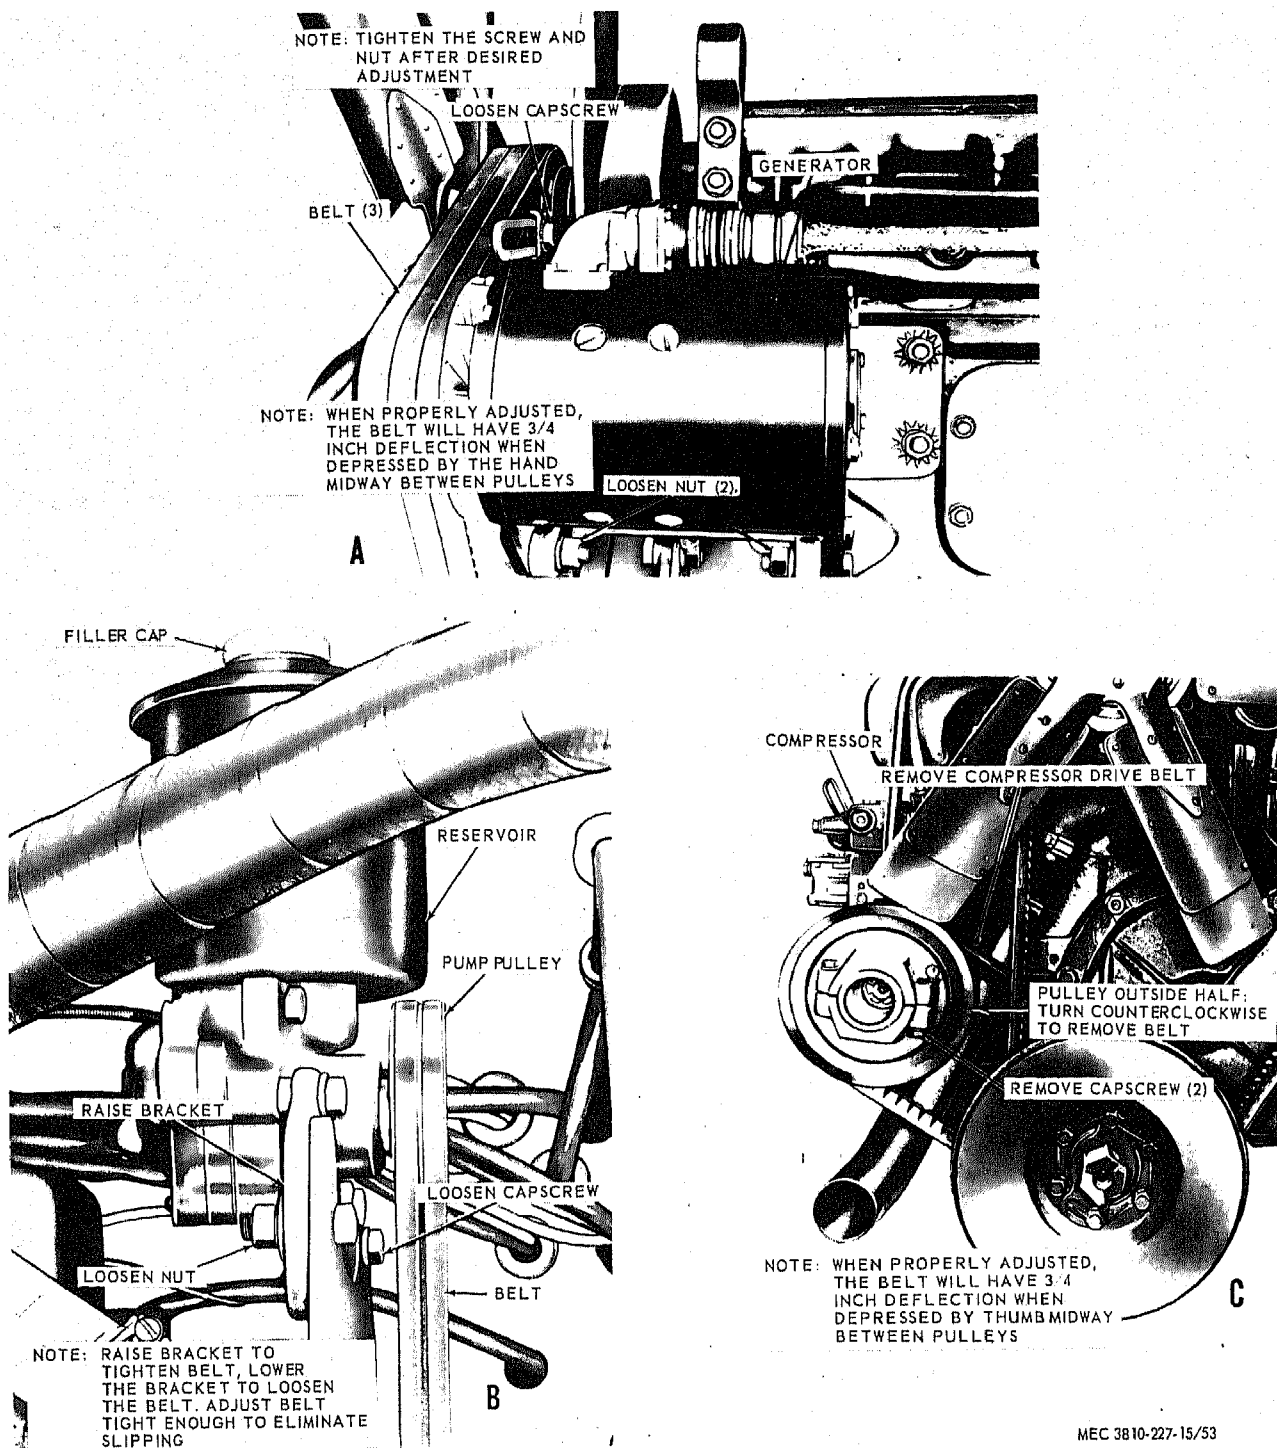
Carrier engine generator belt, adjustment, removal and installation.
